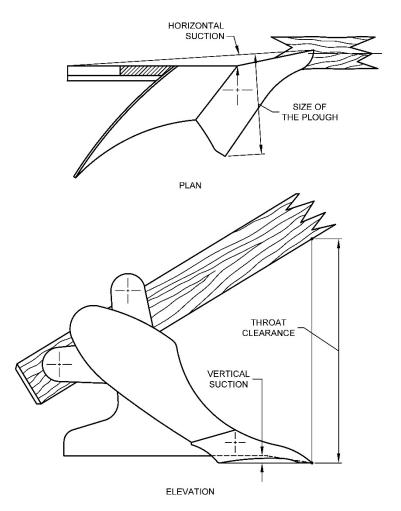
Measurement of Size, Suction and Clearance of the Mouldboard Plough, Fixed Type
